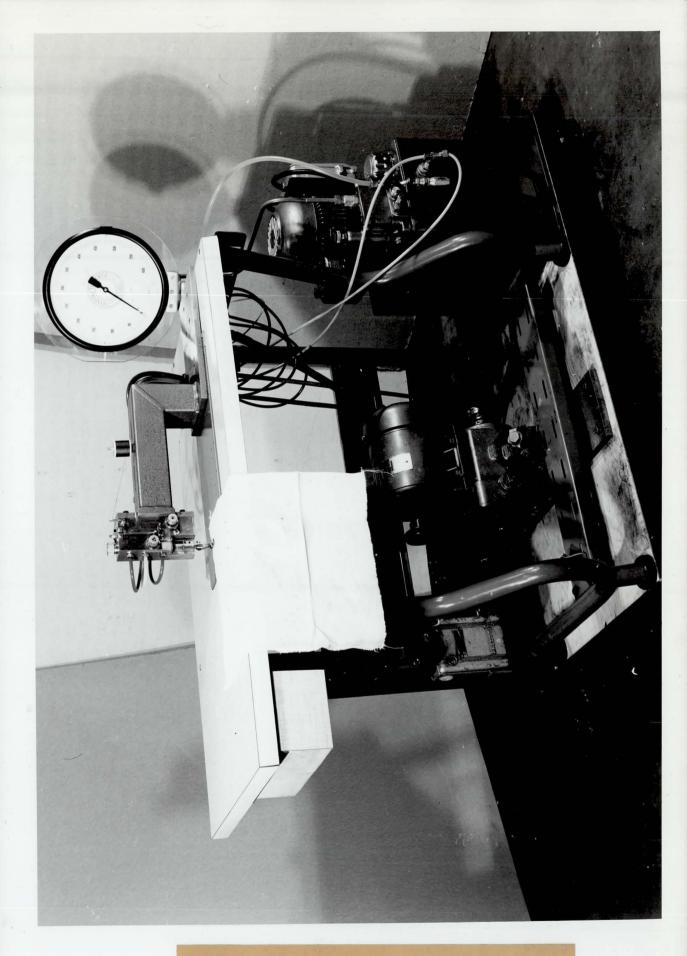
GENERAL VIEW OF THE HYDRAULIC LOCKSTITCH SEWING MACHINE
